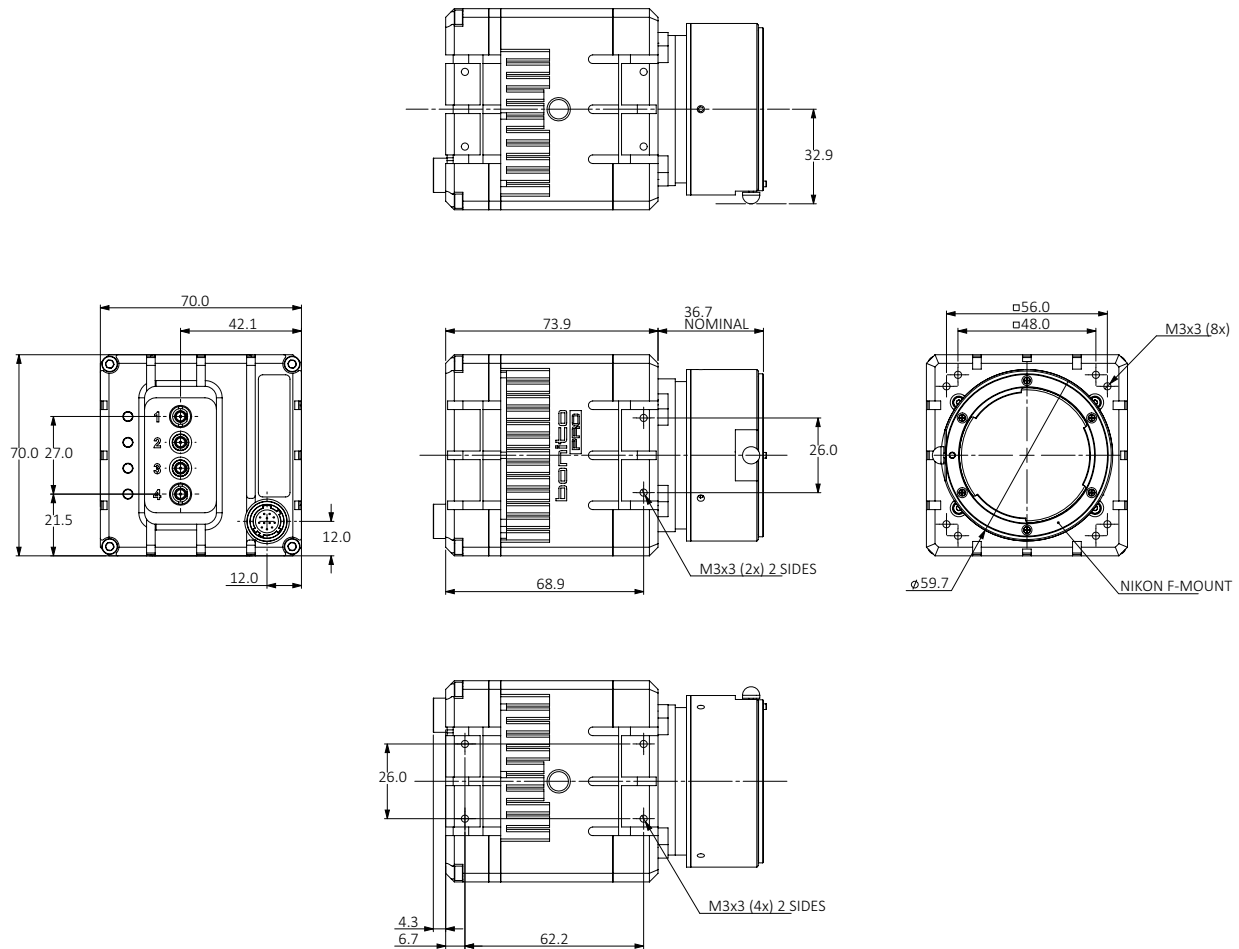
Bonito PRO camera with F-Mount mechanical dimensions
